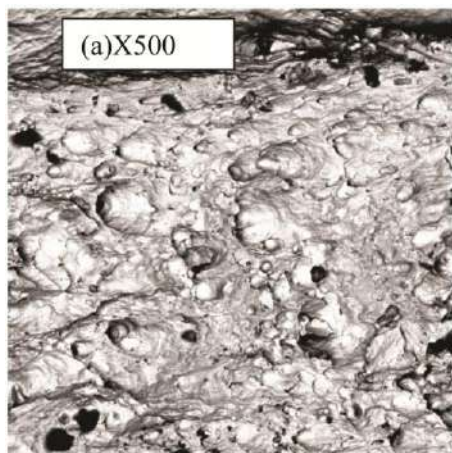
Fractographic image of tensile sample of Hot rolled steel
